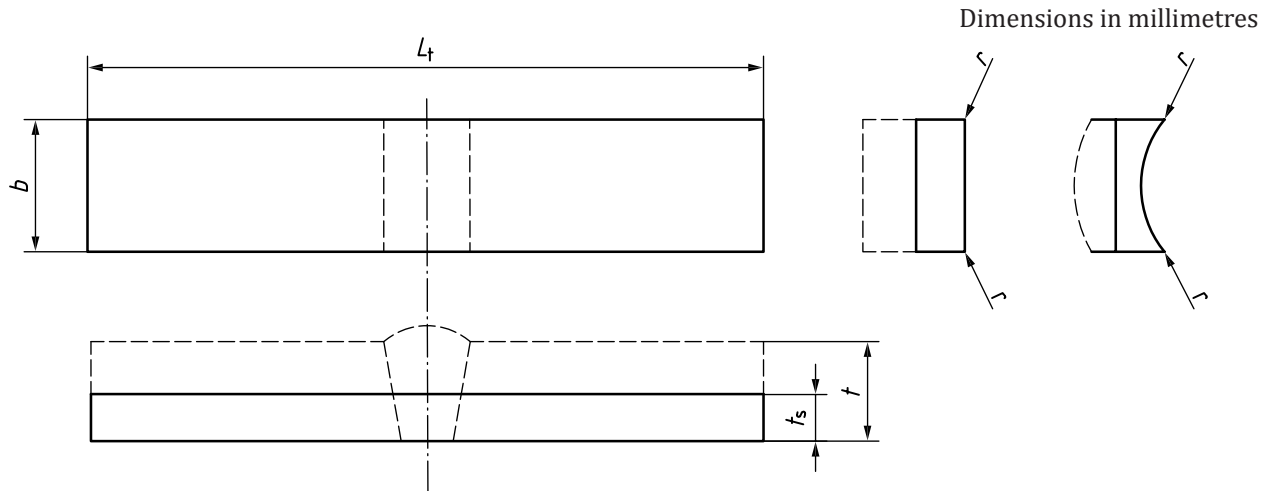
Transverse face bend test specimen for a butt weld (TFBB)
